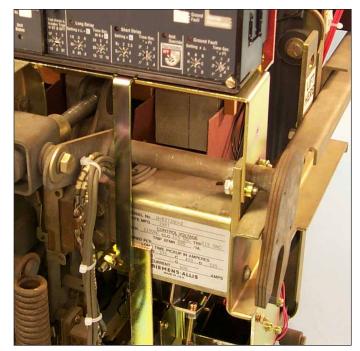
Trip Unit Assembly Mounted to the Breaker.
